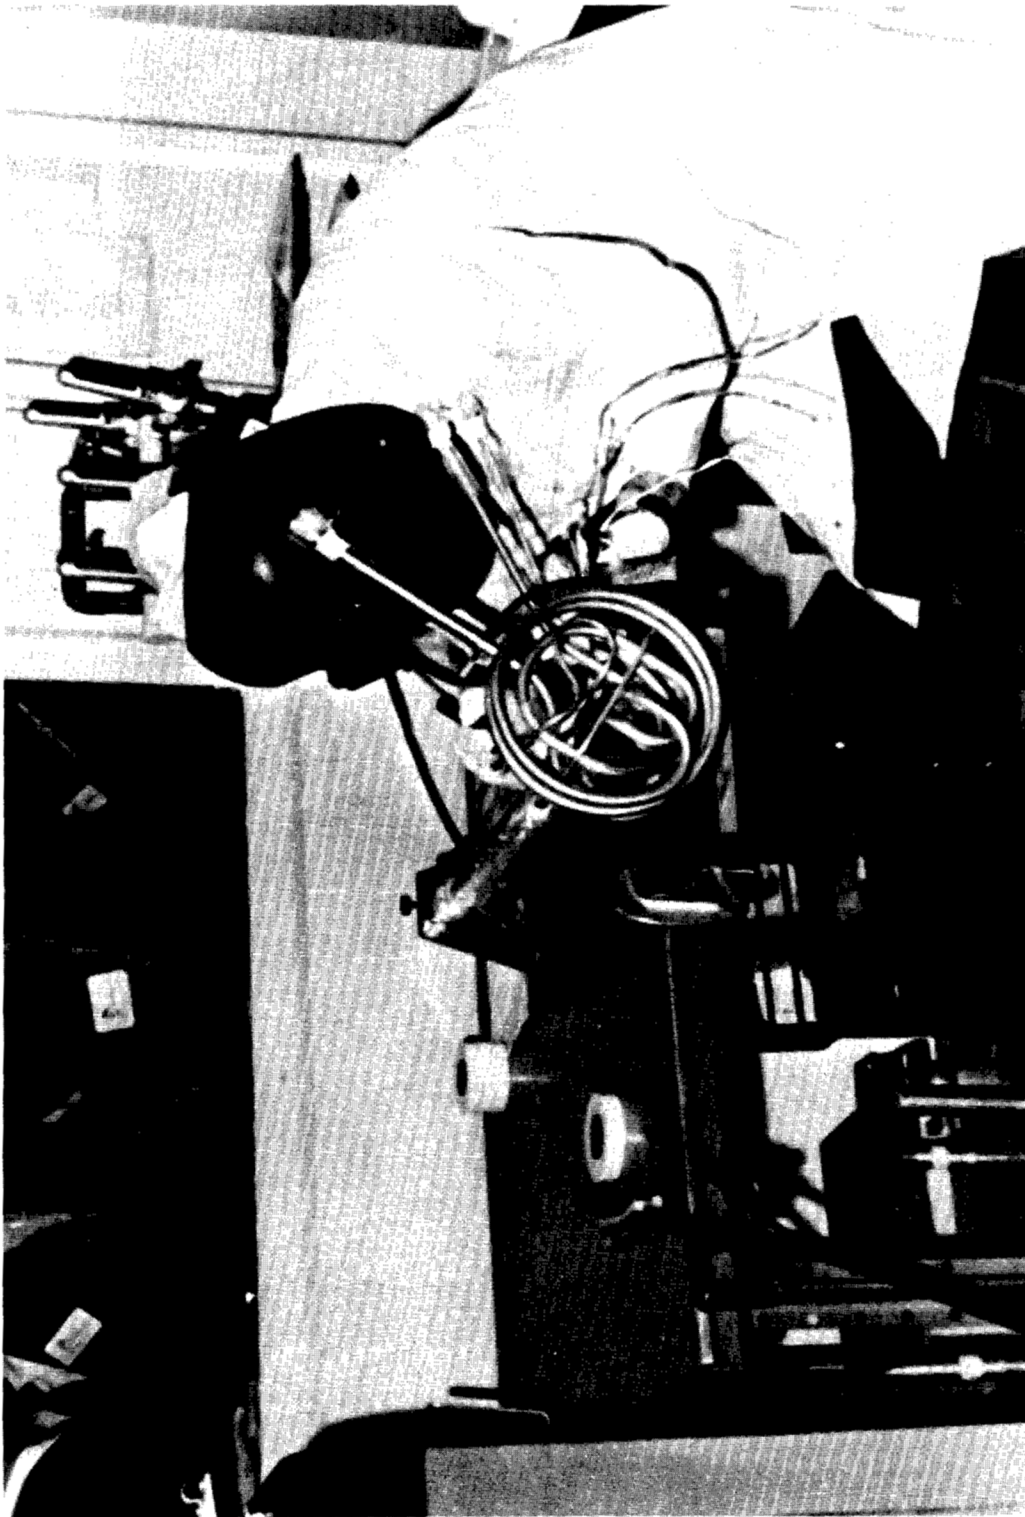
Welding the quantity probe to coil assembly.
